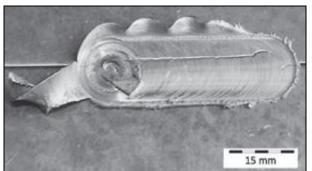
A macrograph image top view of FSW with high fraction of flashing material on the surface [50, 80].
